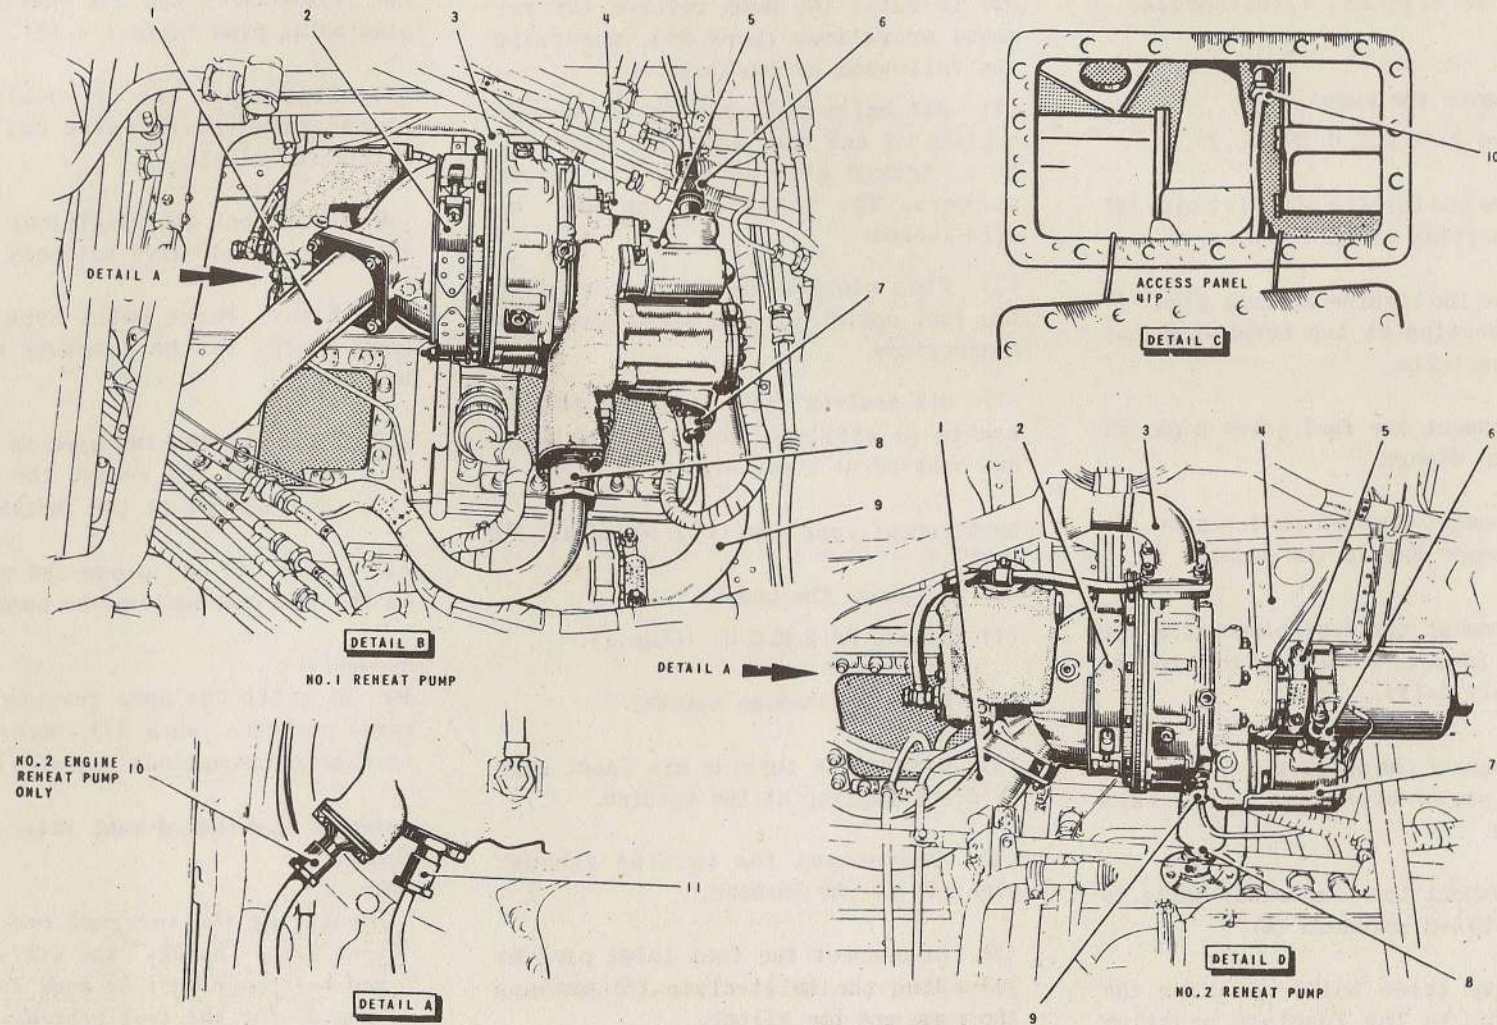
REHEAT PUMPS - REMOVAL AND ASSEMBLY
